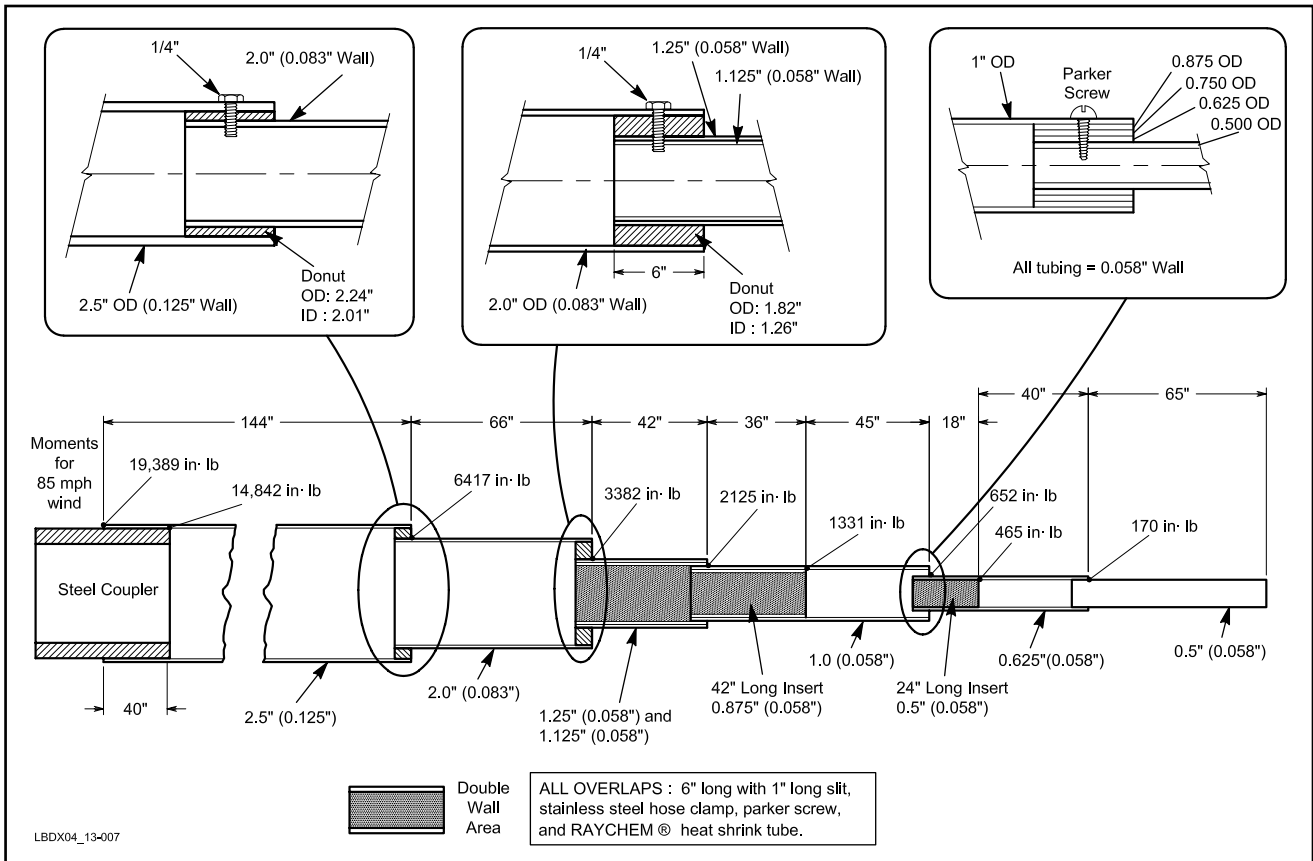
Layout of the 40-meter reflector using US materials (inch dimensions).
